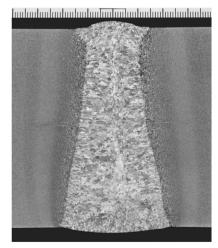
Cross-sectional macrograph of weld joint
